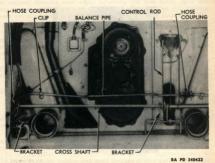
Fuel Tank Balance Pipe and Fuel Valve
